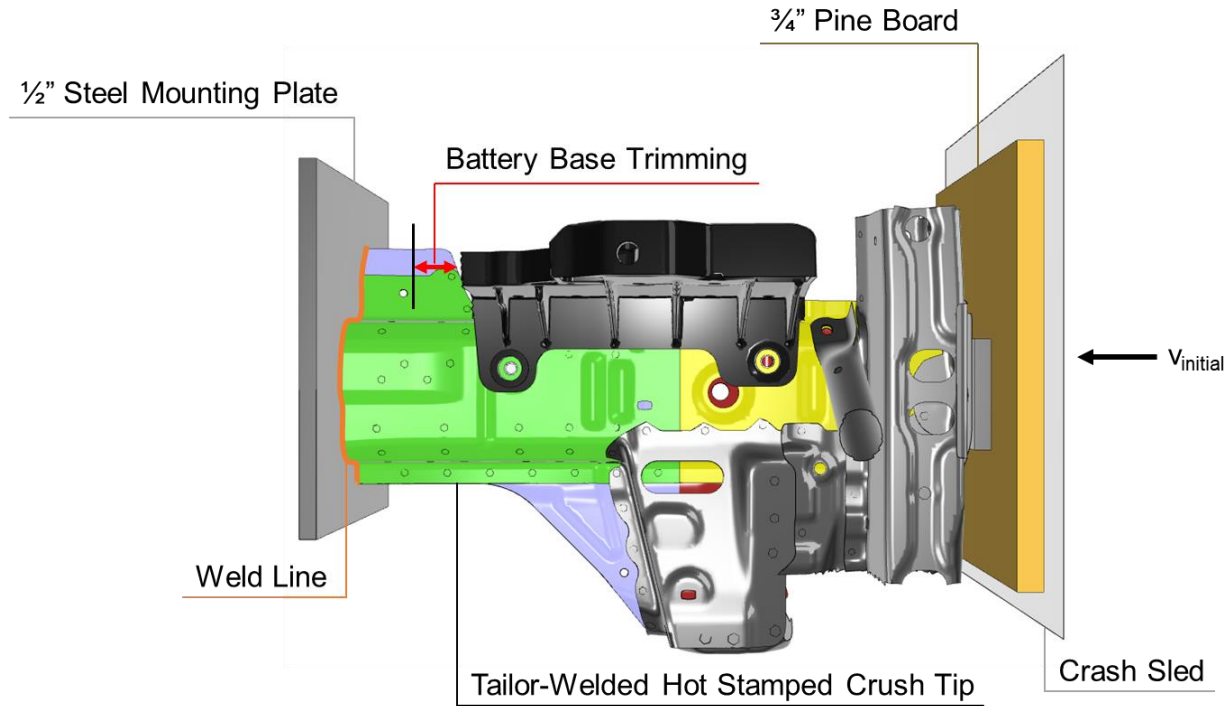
Schematic of the tailor-welded hot stamped crush tip crash test setup.
